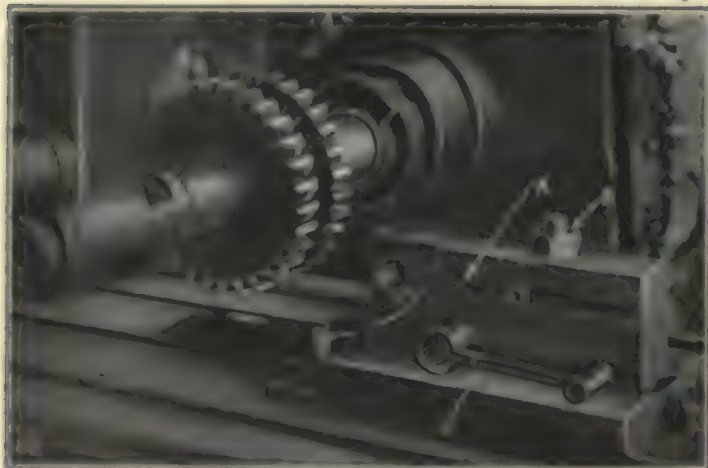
MILLING AIR-MOTOR CONNECTING RODS. FIG. 24—GRINDING THE CRANK BEARING IN A CONNECTING ROD
